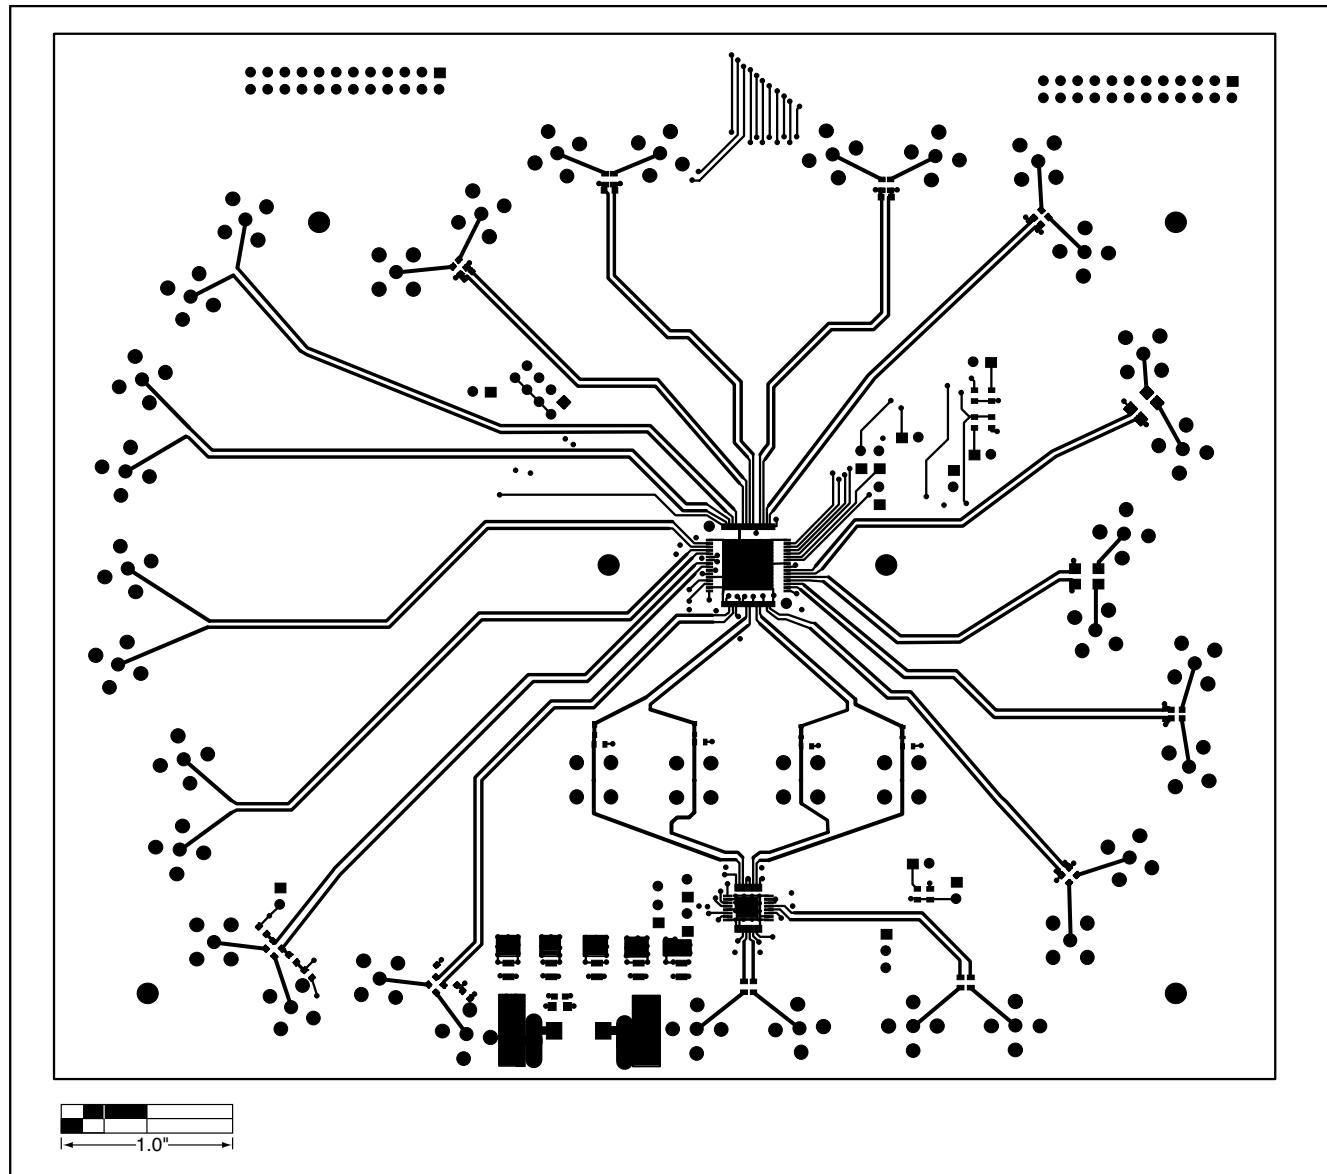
MAX3831/MAX3832 EV Kits PC Board Layout—Component Side
